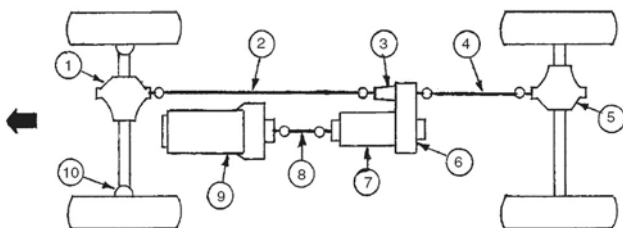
General arrangement of a part-time four-wheel drive system for off-road vehicles [5]: 1,5- final drive, 2,4,8-propeller shaft, 3-FWD clutch, 6-transfer gears, 7-main gearbox, 9-engine and clutch, 10-CV joints
